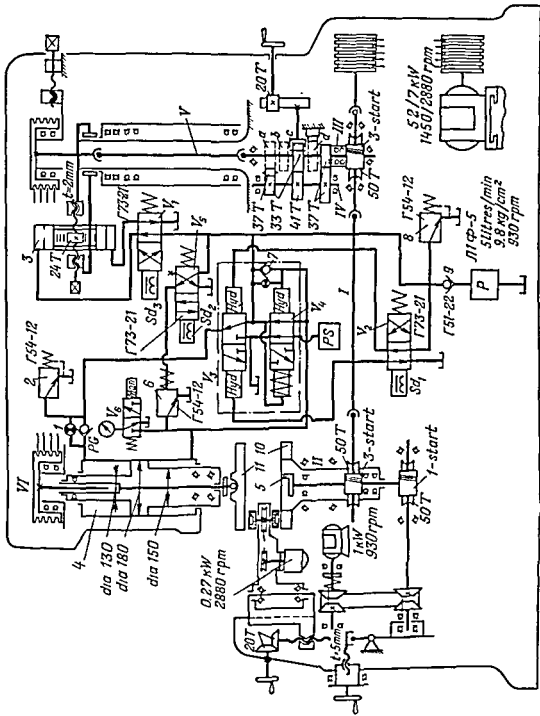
Combined hydraulic circuit and gearing diagram of the model 3B810 tapping machine
